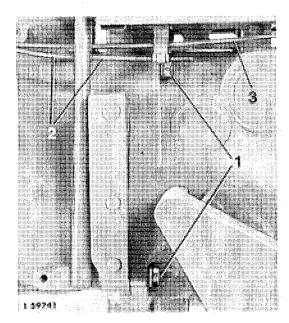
Separating between Engine and Clutch Housing, L. H. Side
